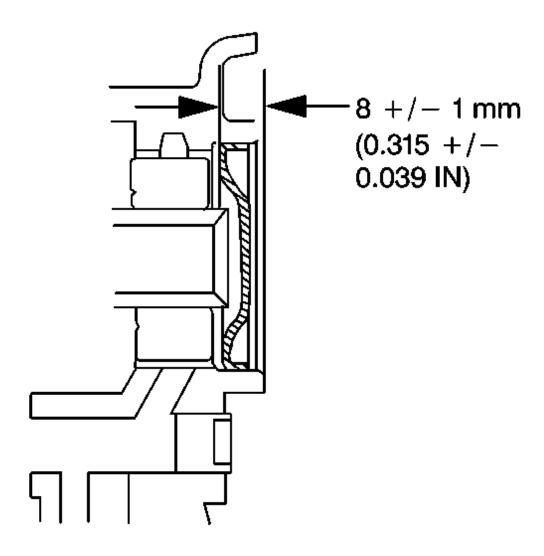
Proper Bearing Plug Installation Courtesy of GENERAL MOTORS CORP.
